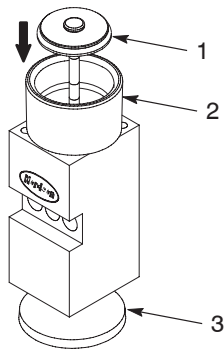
Pushing the needle-and-piston assembly through the piston insertion tool into the module body
